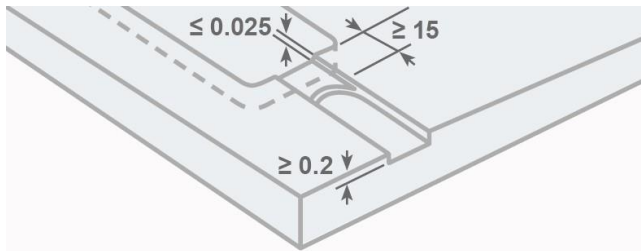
Example for the mold venting design for Alfater XL® (dimensions in mm).
